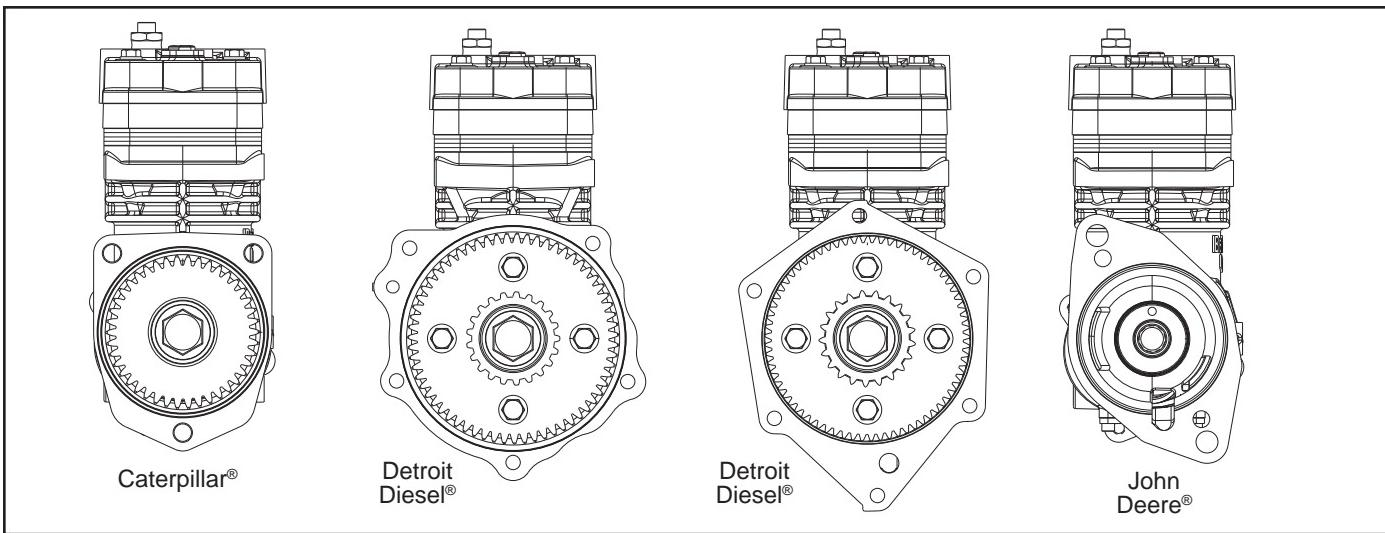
TYPICAL COMPRESSOR DRIVE FLANGES
